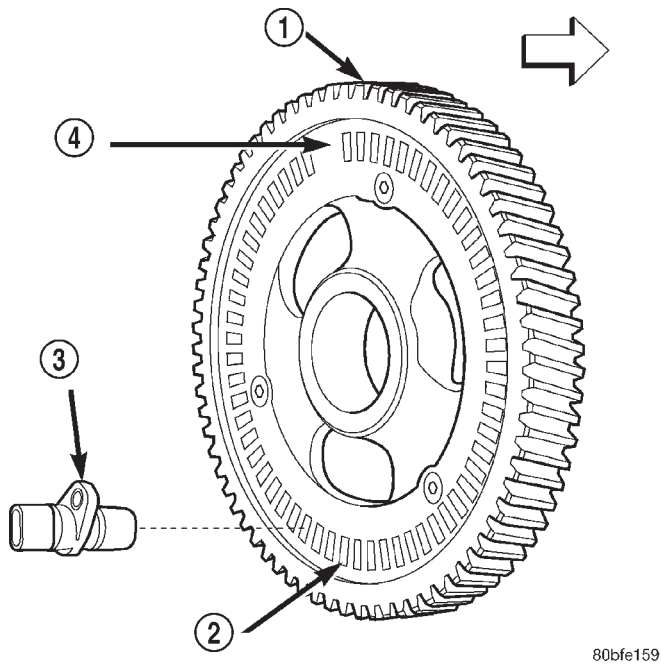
Notches at Rear Of Camshaft Drive Gear
